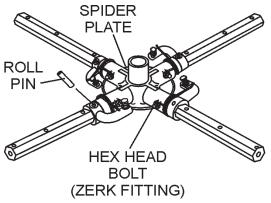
Removing Roll Pin and Zerk Grease Fitting
